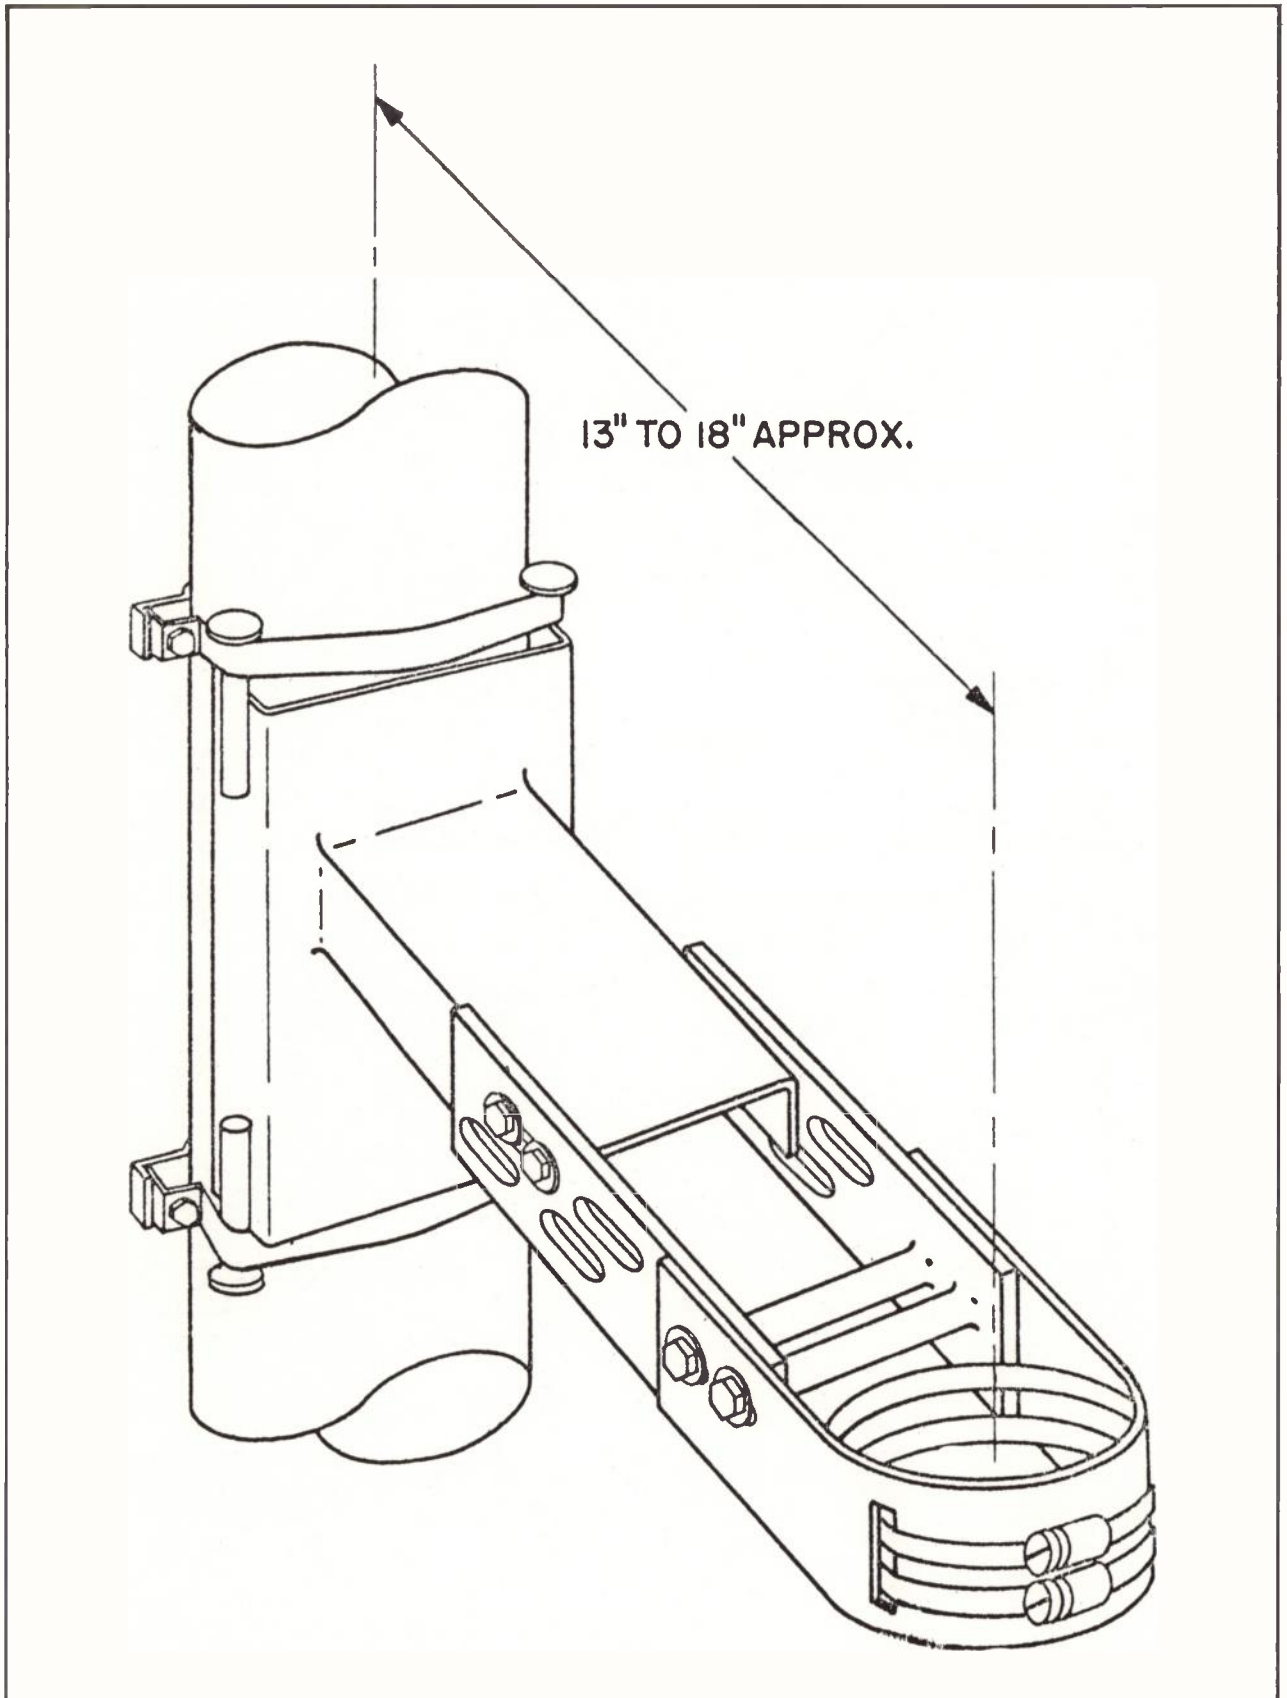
Typical Mounting Bracket for Towers with Leg Diameter of 4 in. to 12 in.
